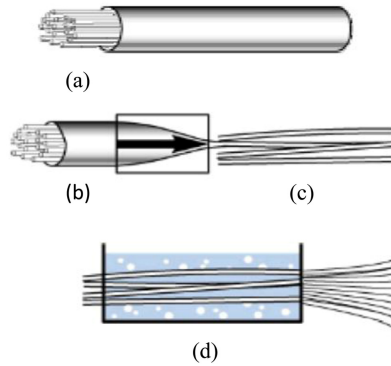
(a) Coarse train: Iron tube containing metal wires. (b) Wire drawing to reduce the diameter of the wire. (c) Bundling of tubes together. (d) Leaching processing for realizing fibers [16].
